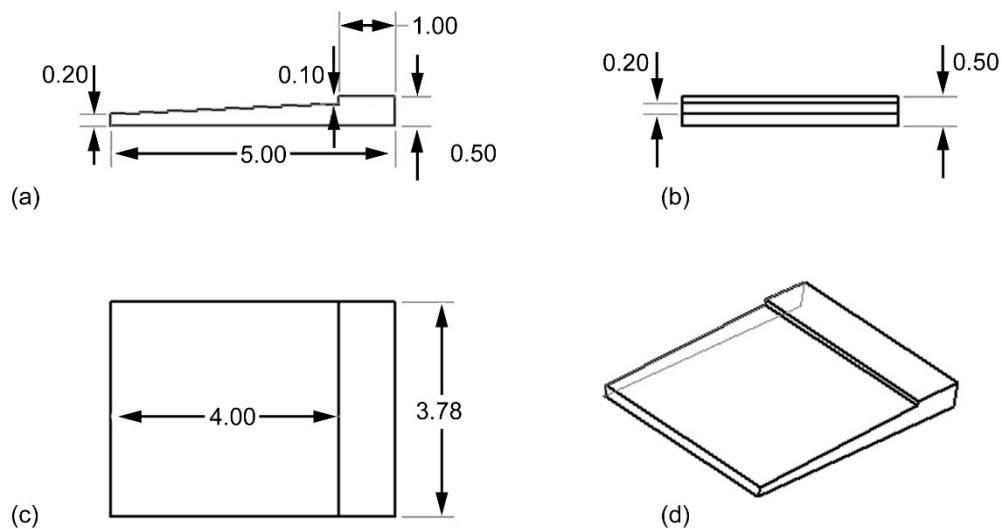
Thick generic fan blade fragment. Dimensions in inches. (a) Side view. (b) Front view. (c) Top view. (d) View of model.
